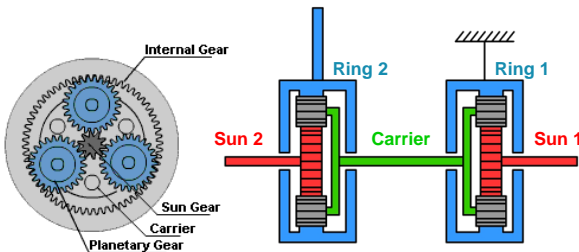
Planetary gearboxes to introduce fluctuating torque.
